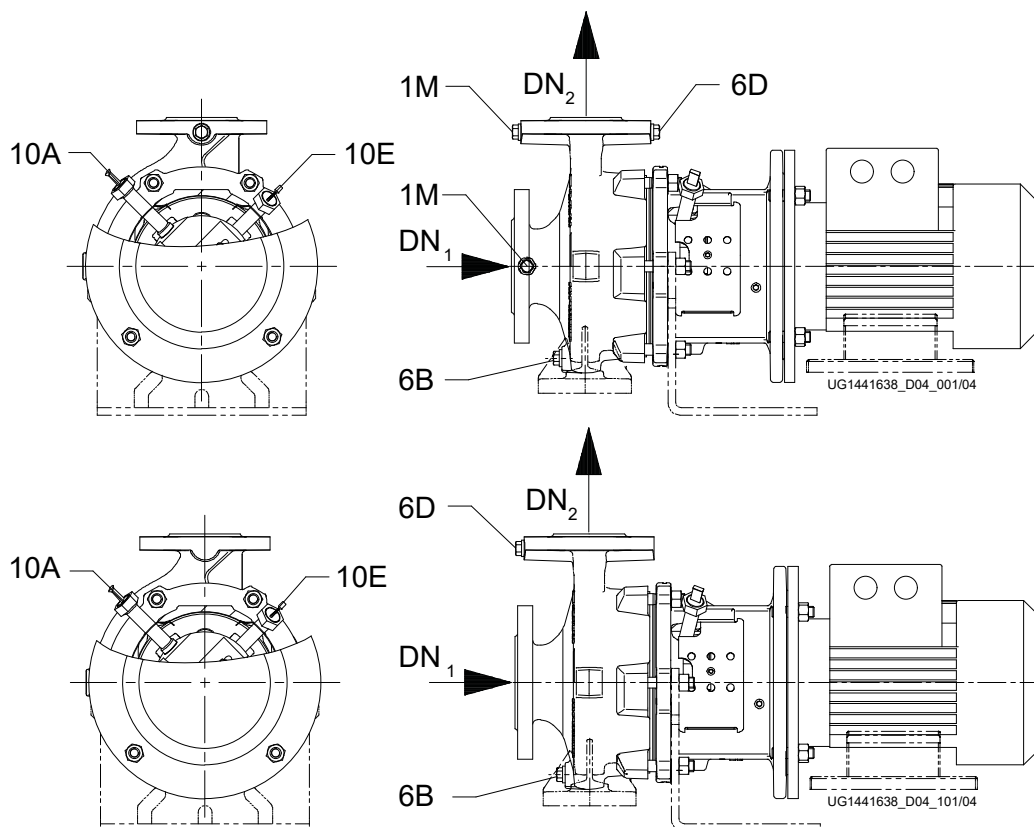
Top: Version with pressure gauge connection; bottom: Version without pressure gauge connection
